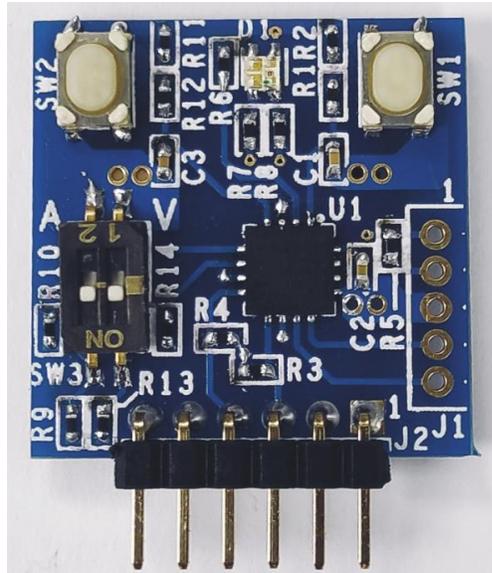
Top view of InnoSwitch3-Pro Toggle Board.
